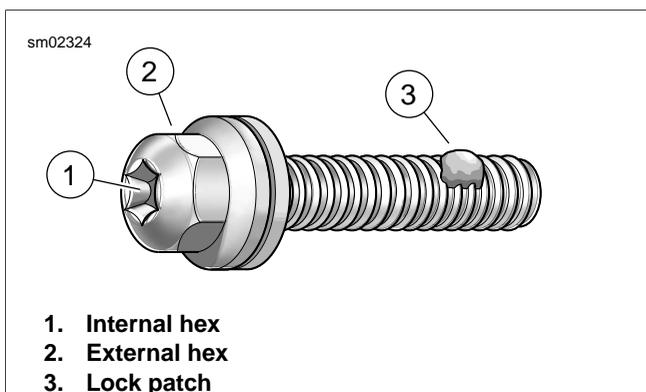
Rocker Cover Bolt (Rocker Housing Bolt Similar)
